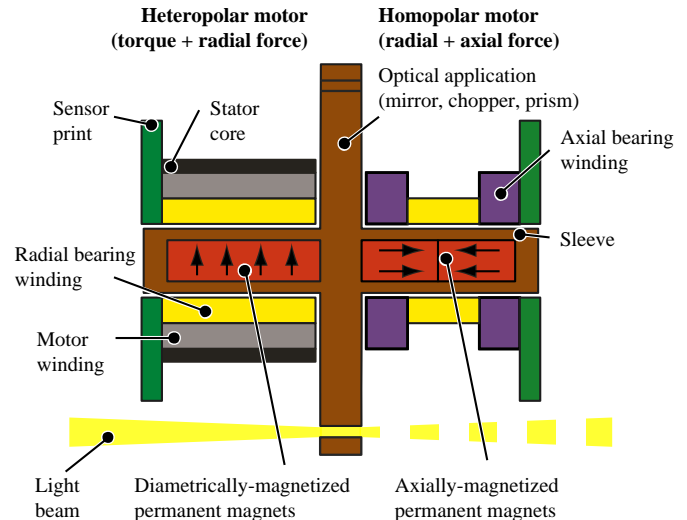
Dual hetero-/homopolar slotless self-bearing motor with optical chopper disc rotor.
